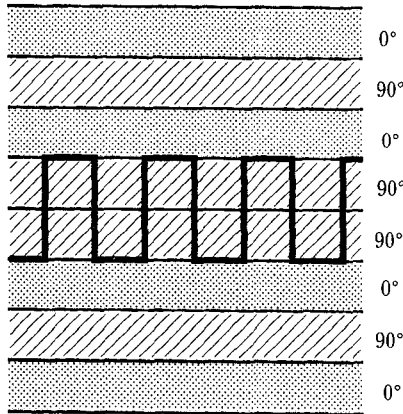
Schematic cross-sectional view of the fracture behavior of type D specimen. The thick line represents the crack path
